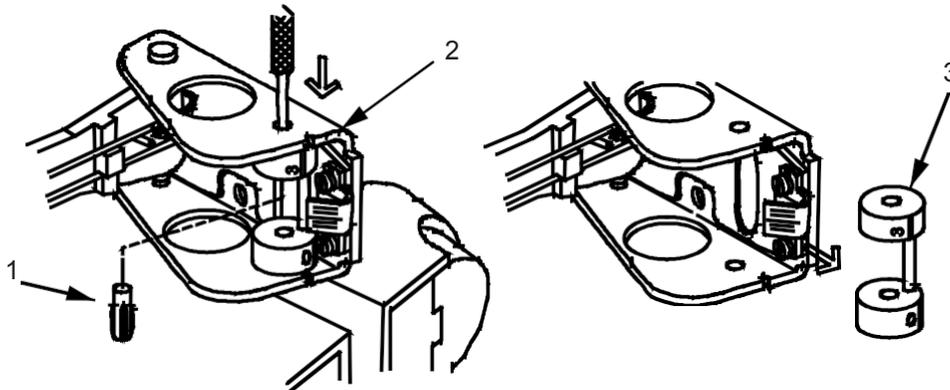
Elevator Assembly, Rear Sight Base, Shaft.
